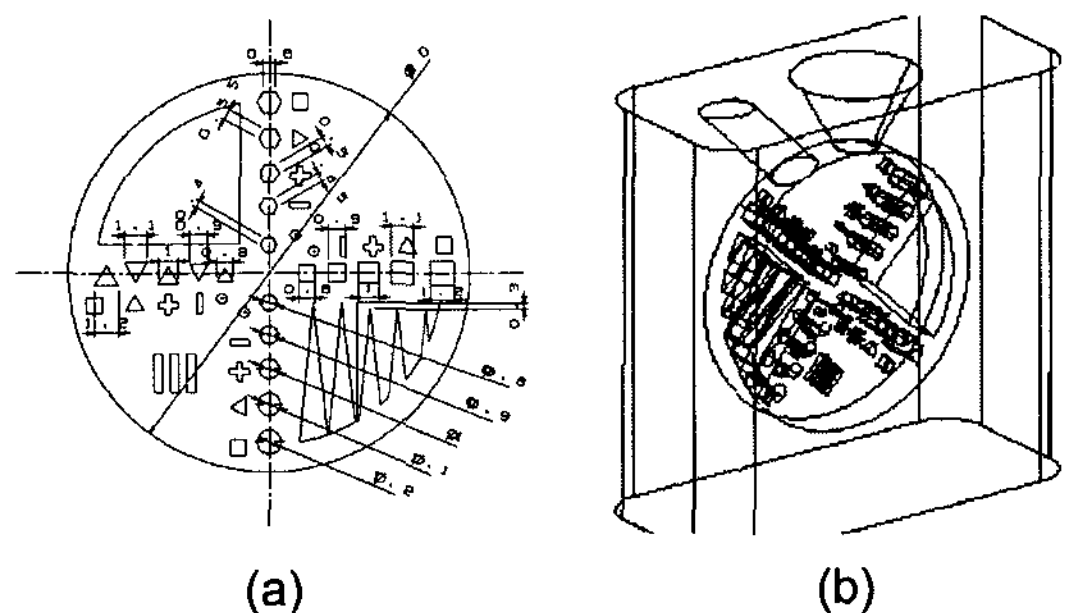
Mold designs (a) TEG pattern, and (b) Duraform mold
